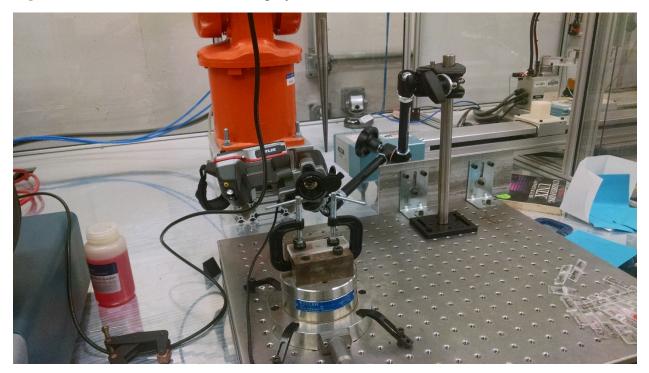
Robotic Ultrasonic Welding System (with thermal camera and force sensor).
